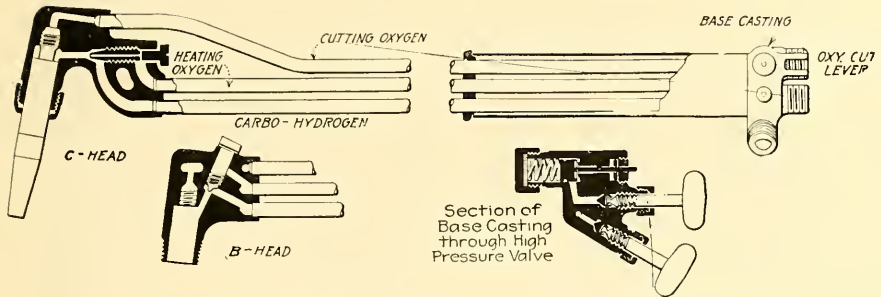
Details of Carbo-Hydrogen Cutting Torches.
